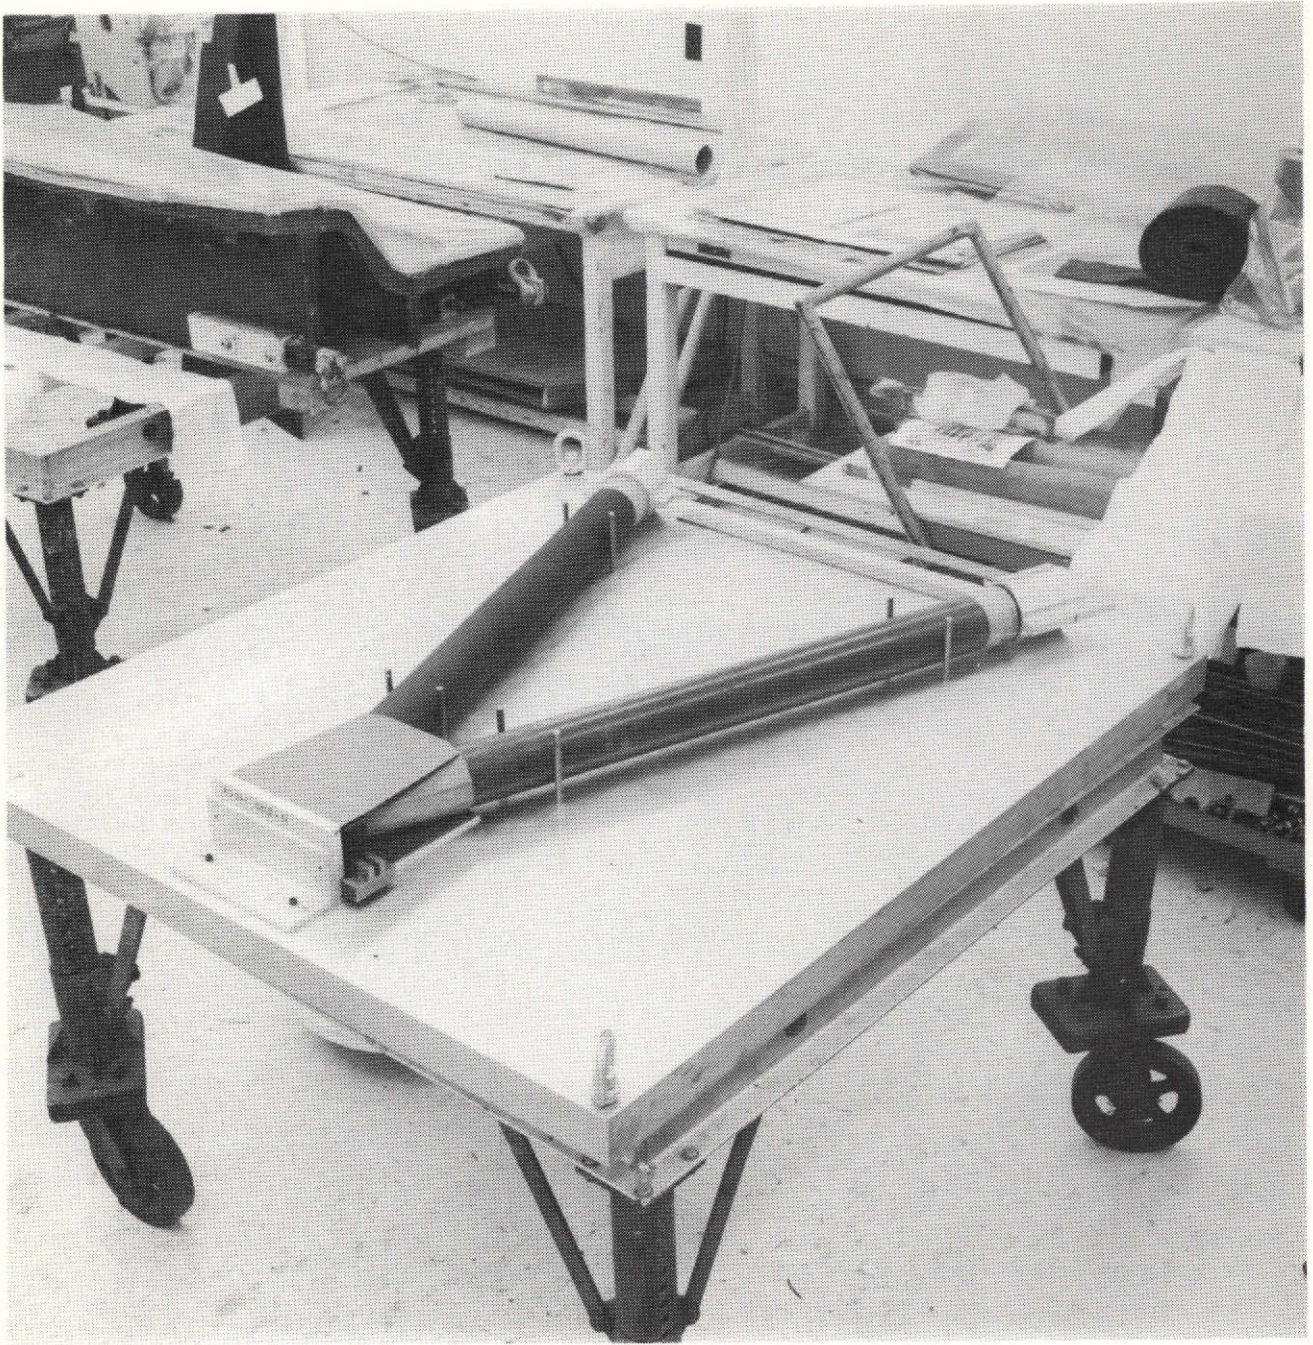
Details Pre-Fit-Two Member Truss Assembly
